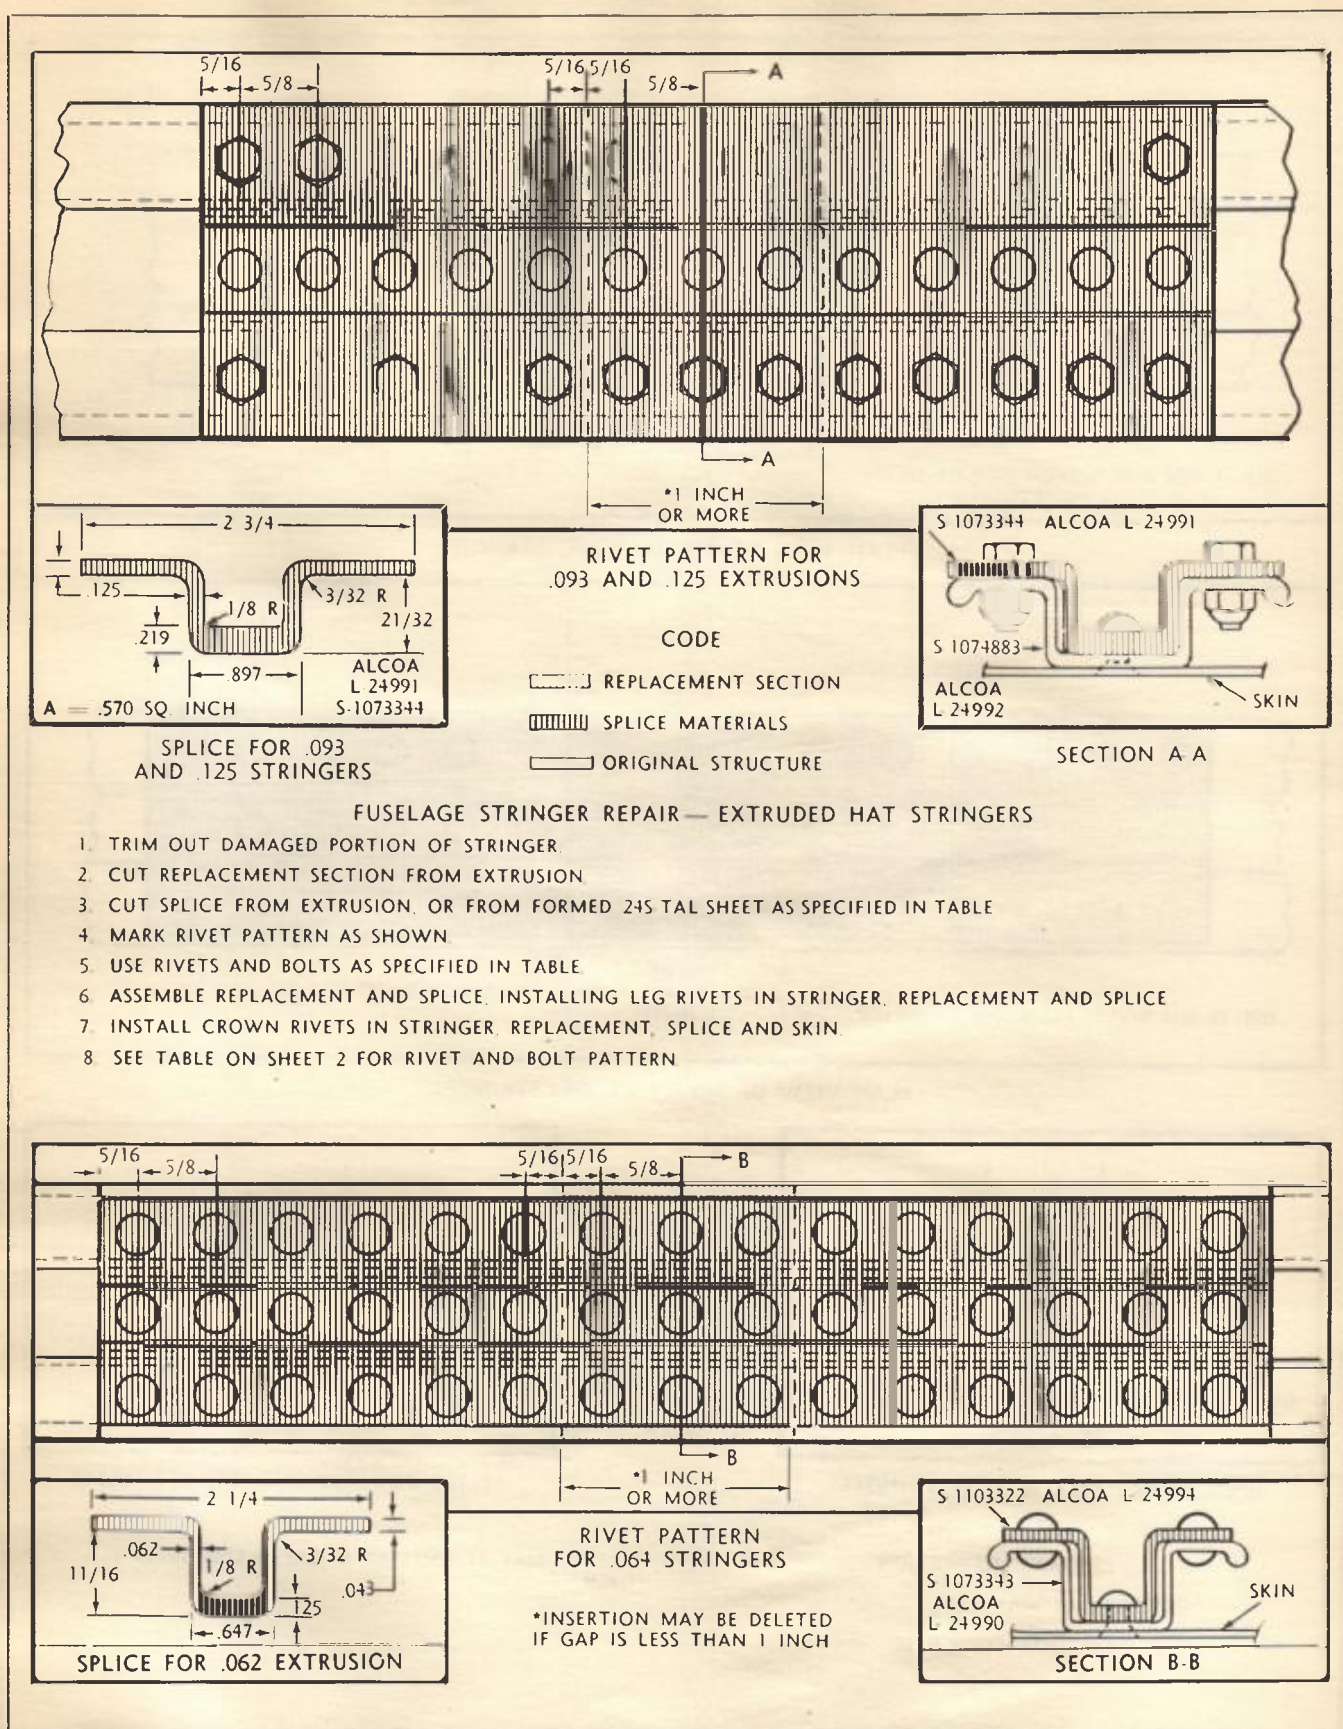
(Sheet 1 of 2 Sheets) — Fuselage Stringer Repair — Extruded Hat Section
